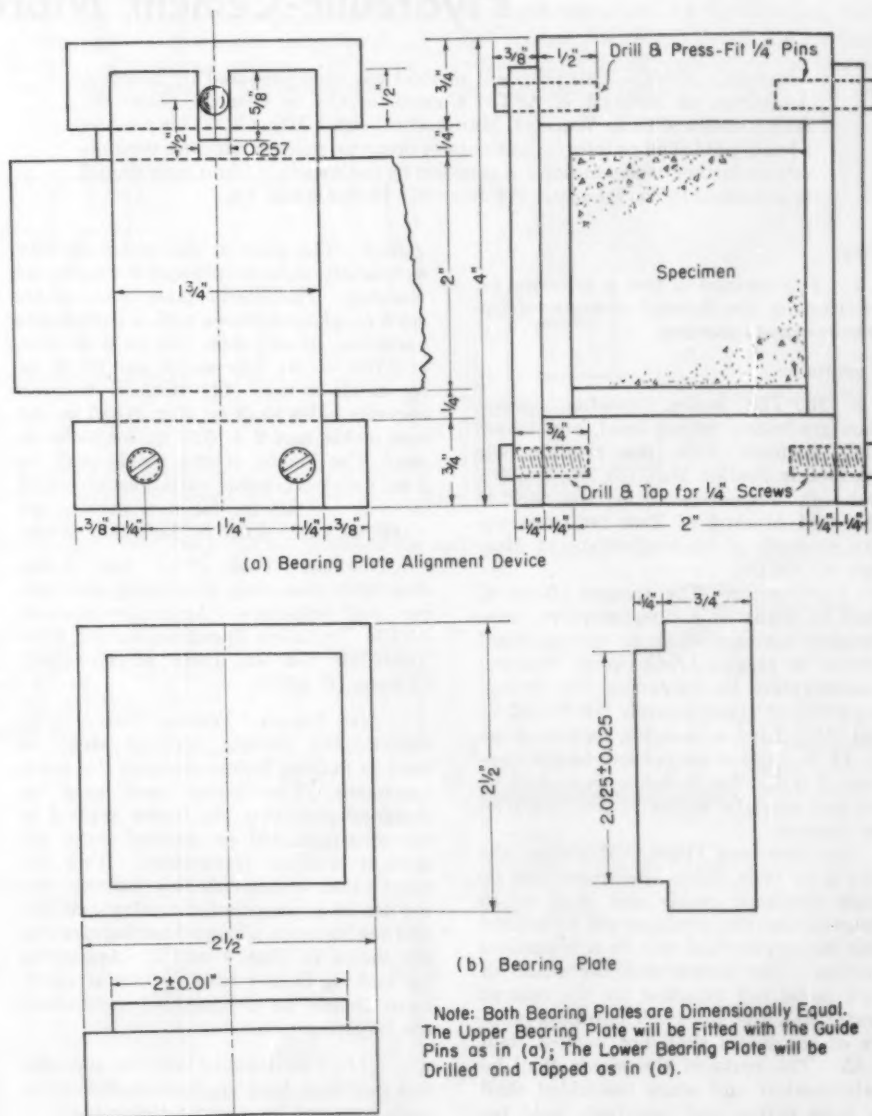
Bearing Plate and Bearing Plate Aligning Device.
